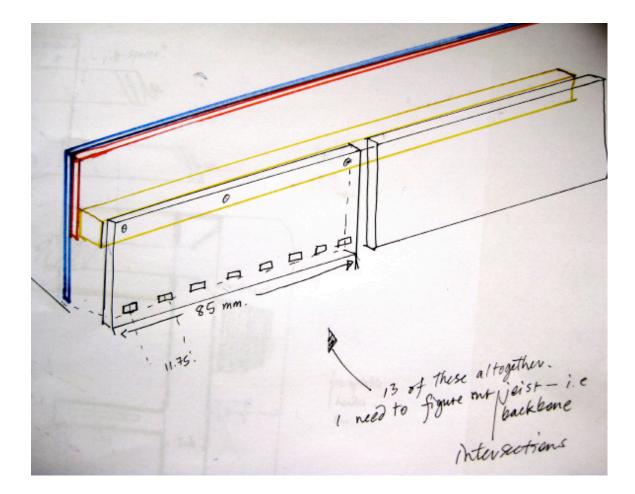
Seaboard 3 chassis inner panel (design) February - September 2010
